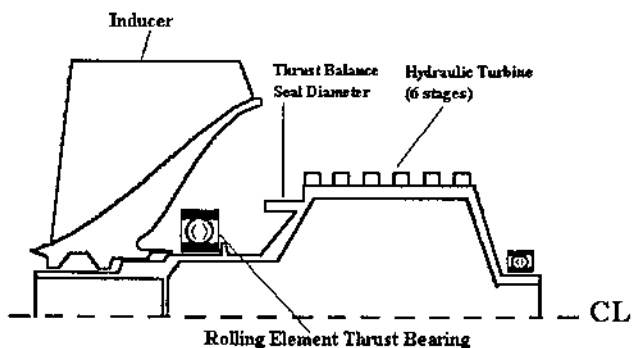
Direct-drive inducer turbopump with rolling element thrust bearing.
